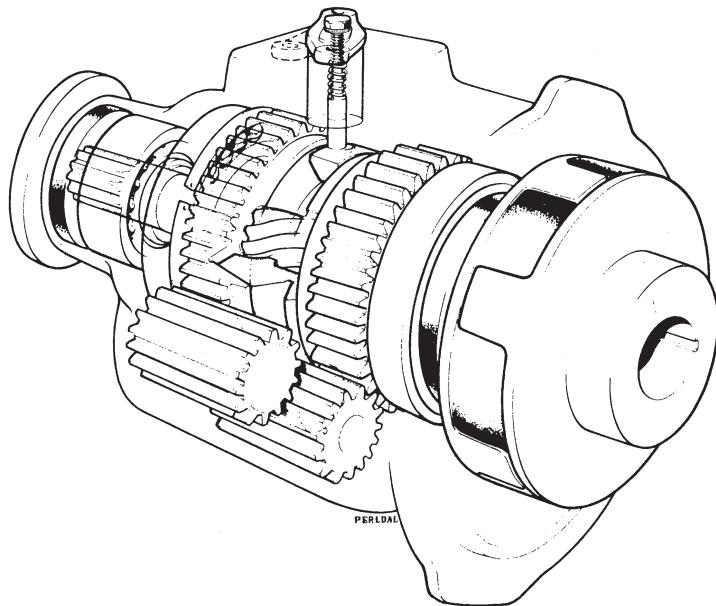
Cross-section through MS reverse gear, ratio 1:1
